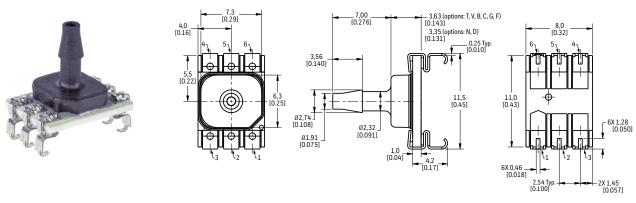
SMT Package Dimensional Drawings (For reference only: mm [in].)
